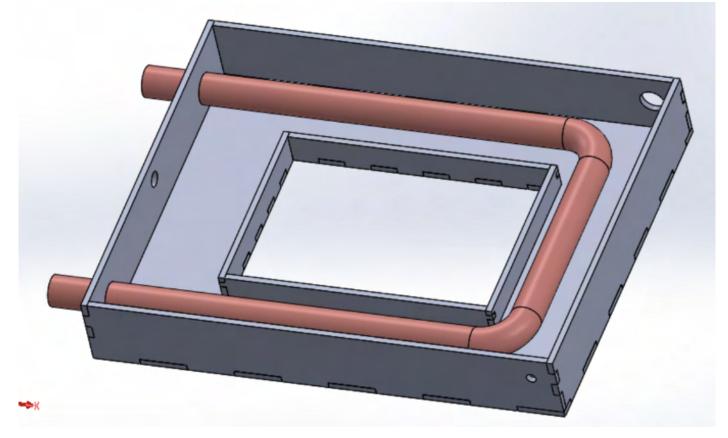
SOLIDWORKS drawing without the lid on the updated assembly.
